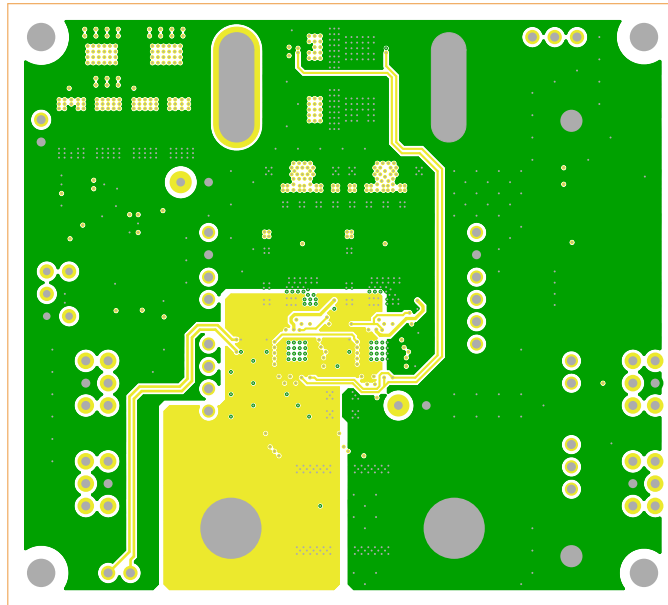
PCB - Inner Layer - Layer 4 (Top View)
